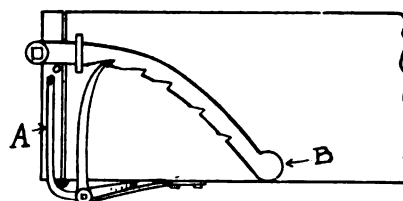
SIDE VIEW OF END GATE FASTENER.
